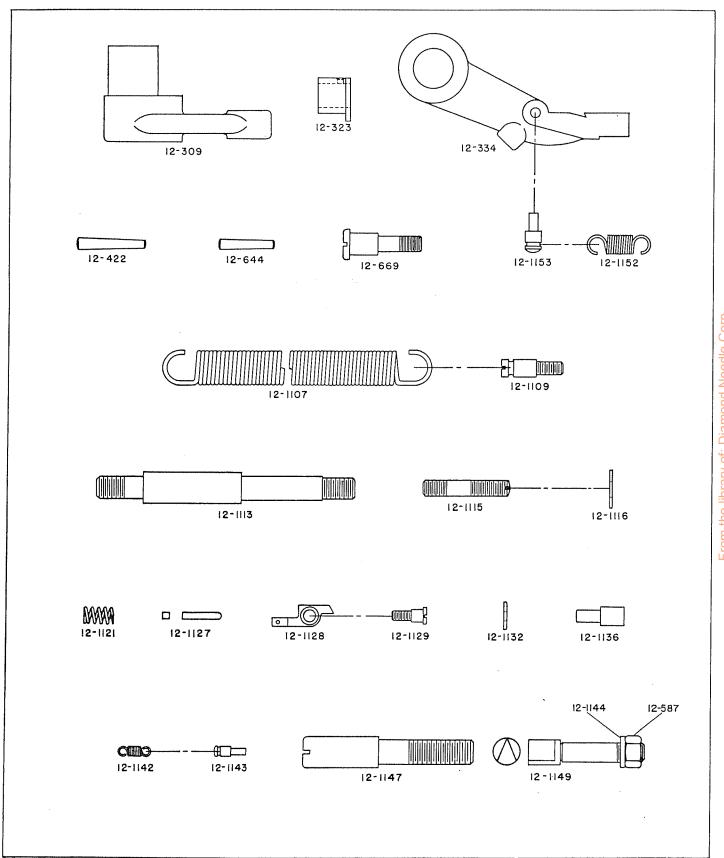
Paste Box and Pasting Mechanism Parts (approximately ½ size)
